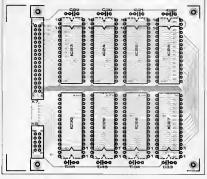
Component mounting plan of the memory extension board. Depending on the memory configuration, 10-way header Ks is connected to Ki, K2 or K3 on the main board.
